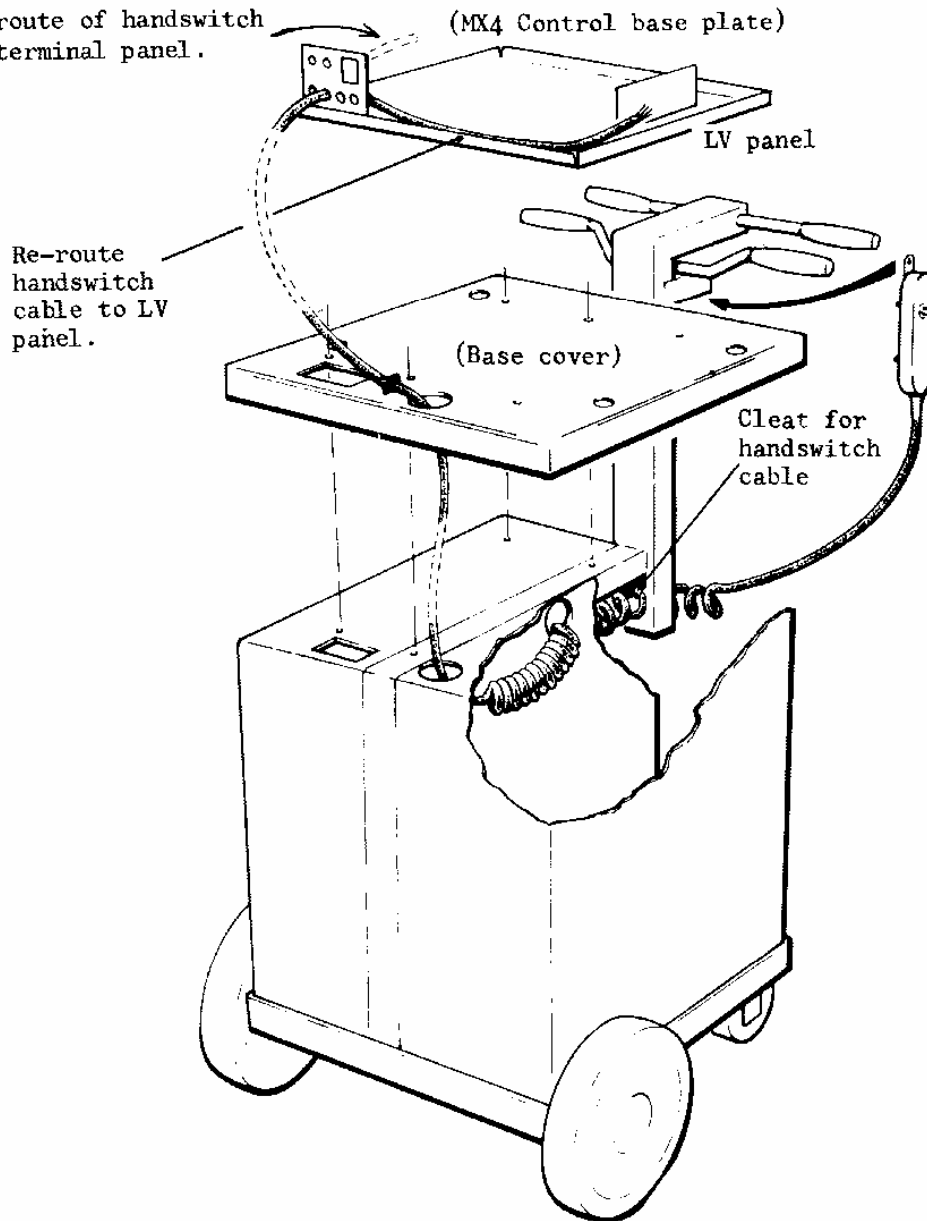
Exploded and Cut-away Views of MX4 Control and Base to
